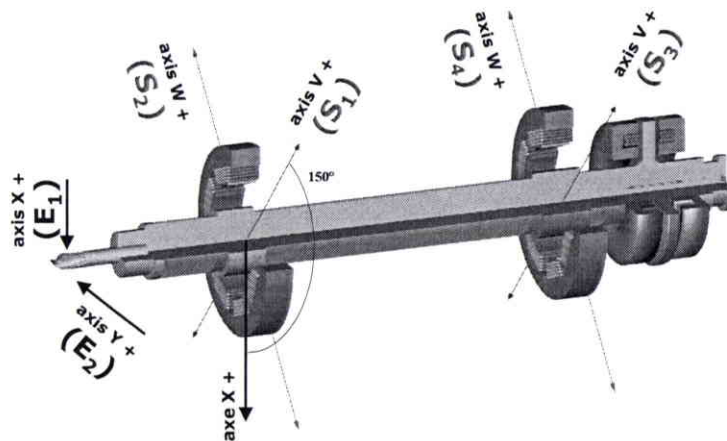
systems of axes of the AMB (V-W) and of the milling machine (X-Y)
